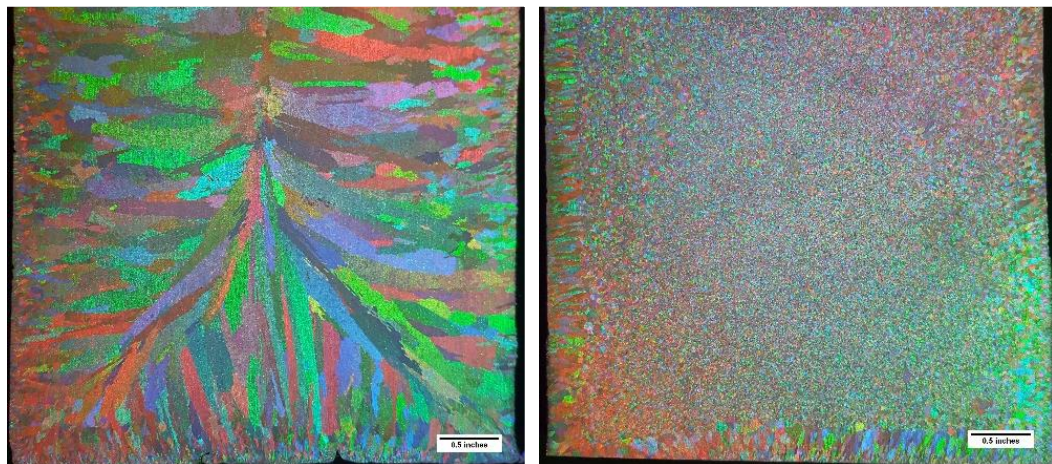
Etched macrostructure of austenitic stainless steel showing a columnar structure (left) and an equiaxed structure (right).
